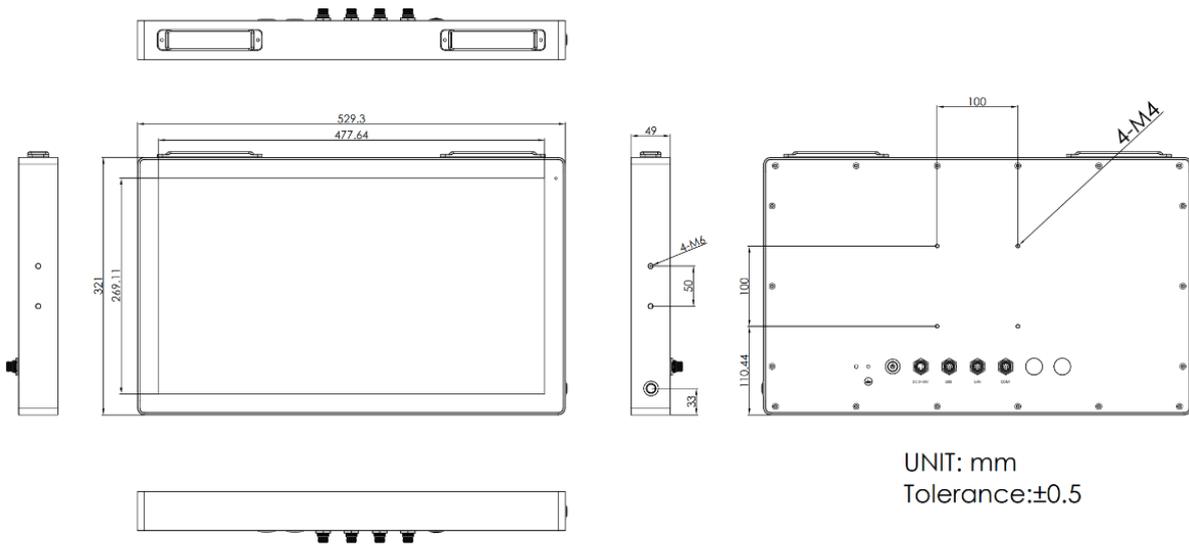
4 Dimensions of NuTAM-921EP(H)
